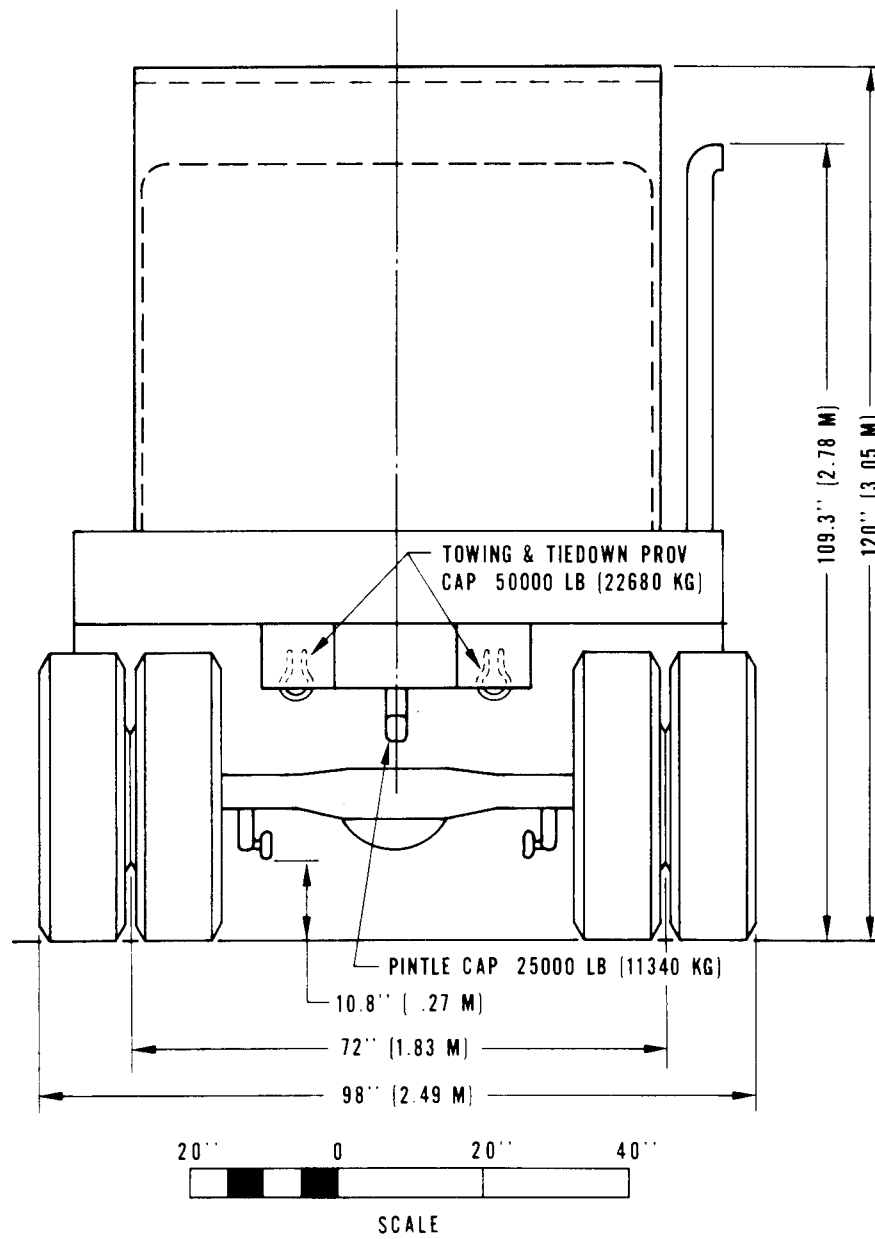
Rear elevation, truck, bolster, M748A1.
